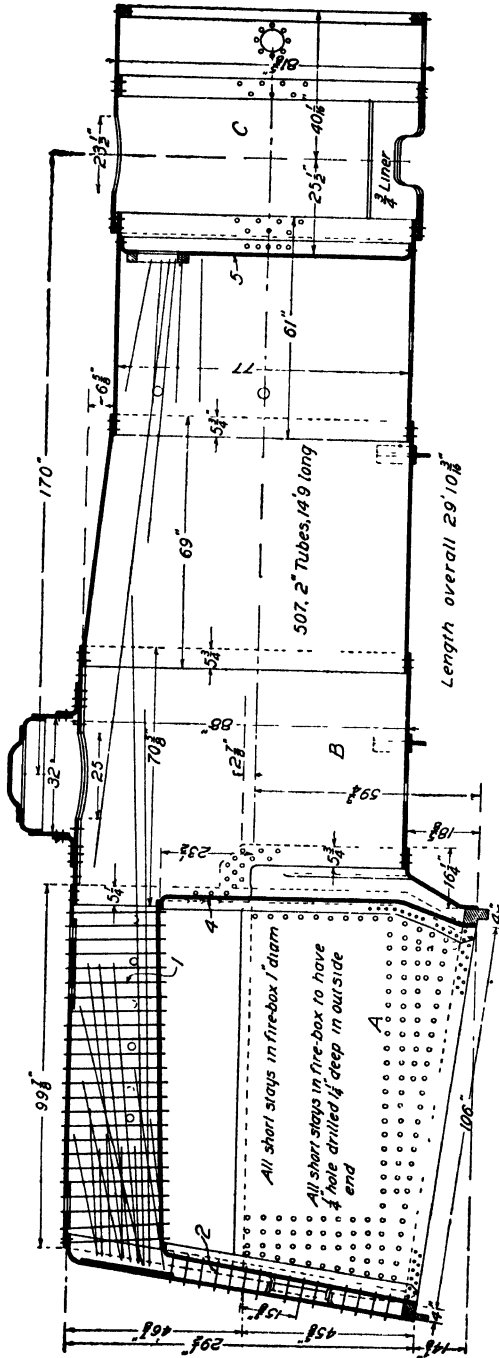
Detailed Drawing of Modern Locomotive Boiler
